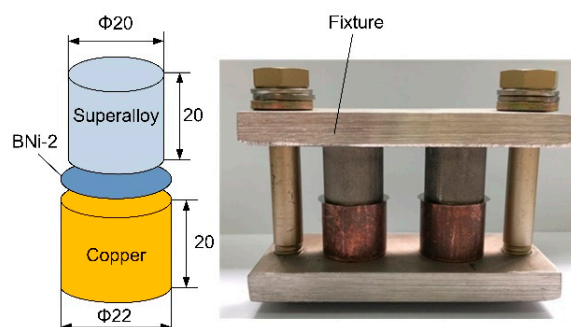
Dimensions (mm) and bonding setup of test specimens.
